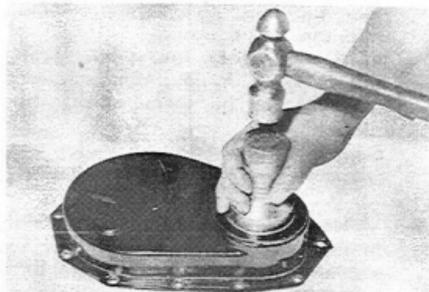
Installing Crankshaft Front Oil Seal V0550
